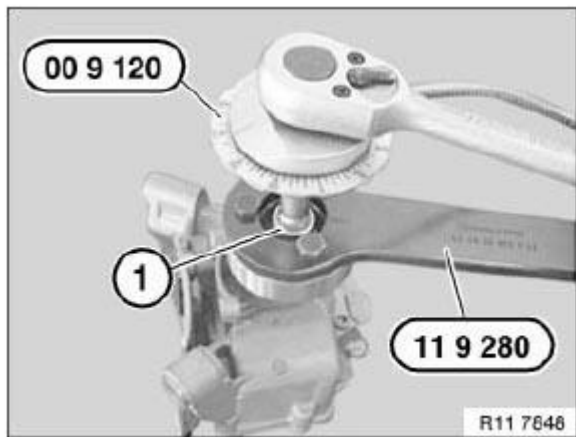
Identifying Special Tool (00 9 120 And 11 9 280)
